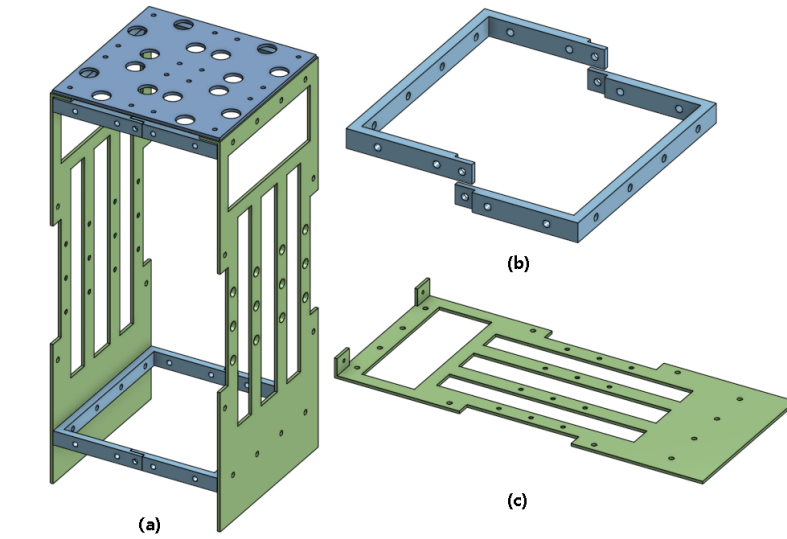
Mechanical models: (a) Assembled frame, (b) Support U-frame, (c) Side frame.
